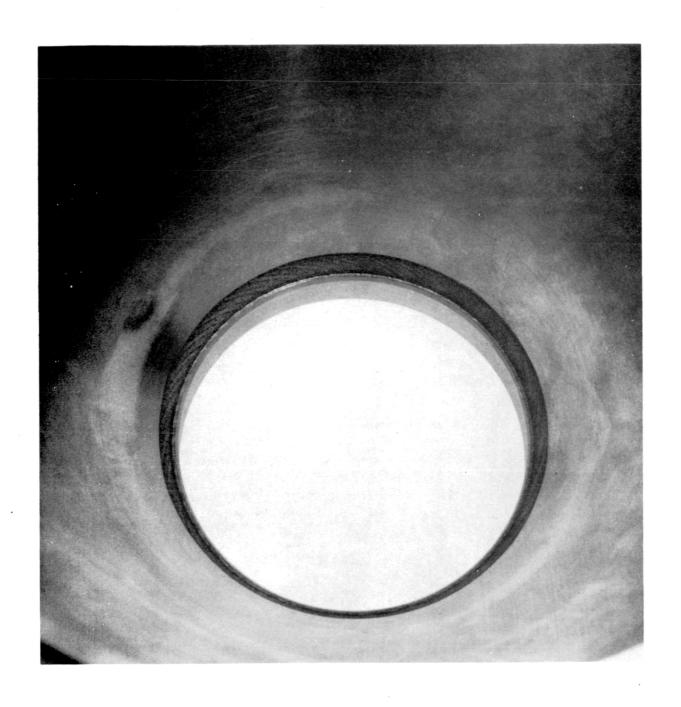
NASA 6:1 Compressor Test Rig, Inducer Failure, NASA Turbine Exhaust Duct Abradable Coating Wear.
